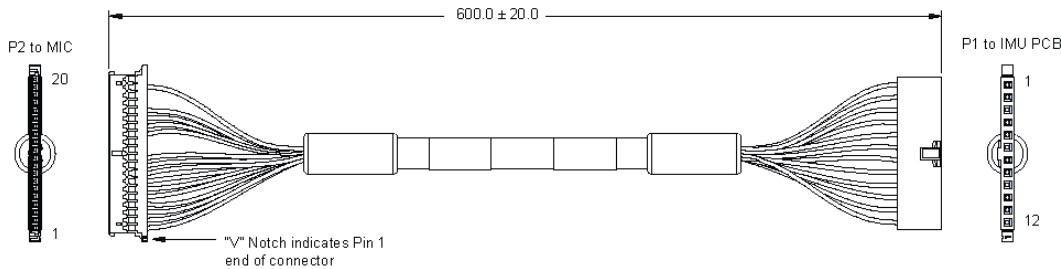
HG1930 IMU-to-MIC Cable Assembly
